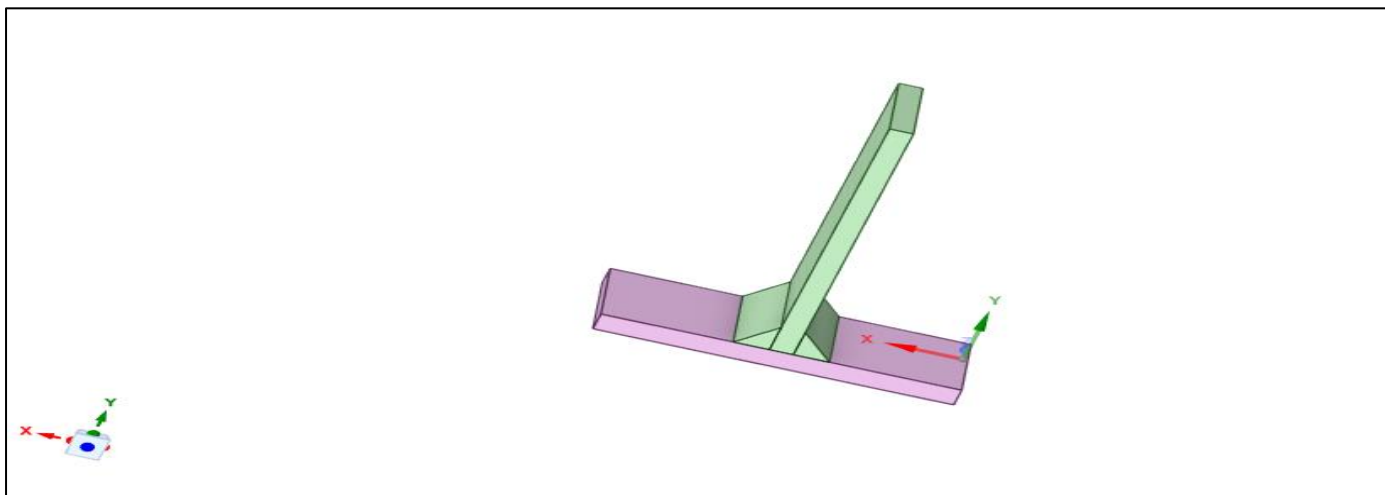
T-Joint Welding Plate Designed on Space Claim
